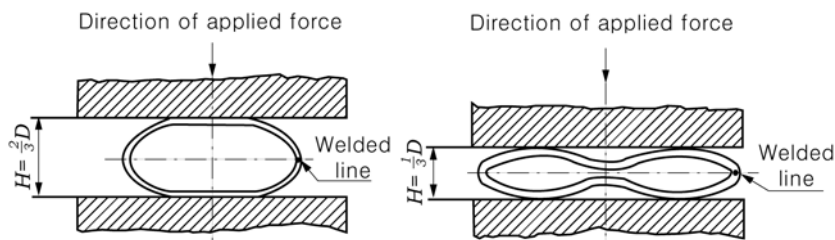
Flattening test of electric-resistance welded steel pipes Grade 1
